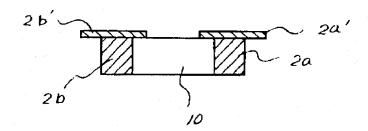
is a plan view showing an exemplary chip component for use in the present device, Fig. 5 is a side view of Fig. 4, Fig. 6 is an assembled plan view showing an embodiment in which a chip component is soldered in parallel with another chip component according to the present device, Fig. 7 is a side view of Fig. 6, and Figs. 8 and 9 are assembled plan and side views showing another embodiment according to the present device.
